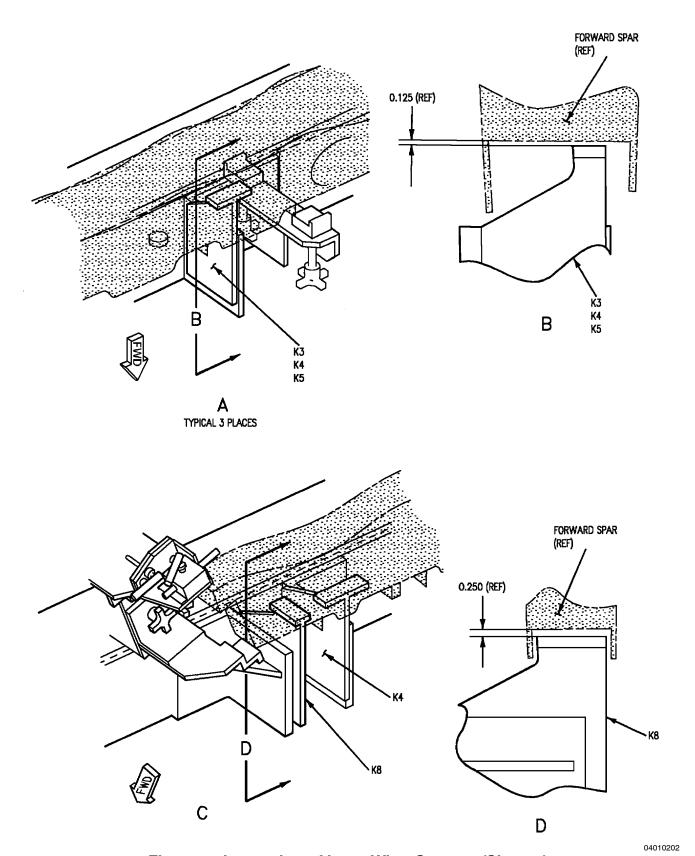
Inspection of Inner Wing Contour (Sheet 2)
